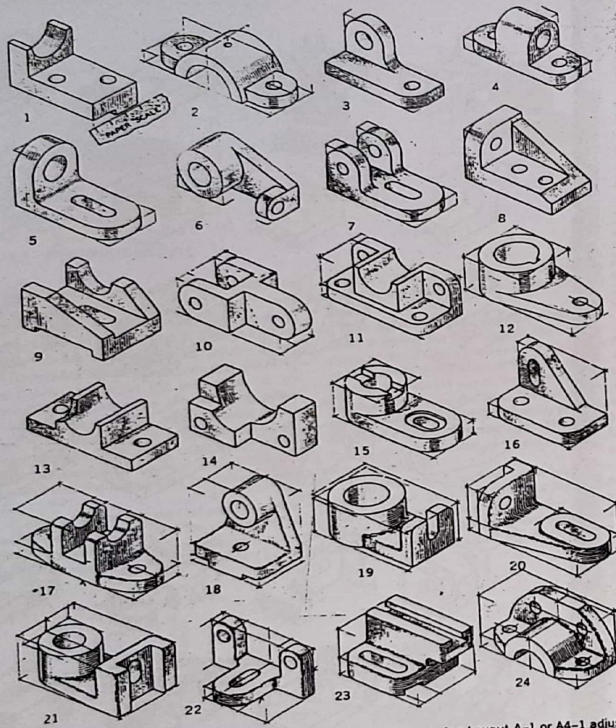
Multiview Sketching Problems. Sketch necessary views, using Layout A-1 or A4-1 adjusted (freehand), on cross-section paper or plain paper, two problems per sheet as in Fig. 5.50. Prepare paper scale with divisions equal to those in Prob. 1, and apply to problems to obtain approximate sizes. Let each division equal either .50" or 10 mm on your sketch. See §5.32. For Probs. 17 to 24, study §5.6.34 to 6.36.
